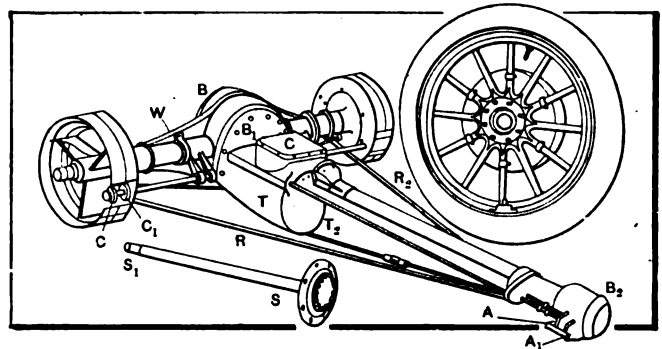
Rear axle transmission unit, with wheels removed and showing the internal expanding brakes
